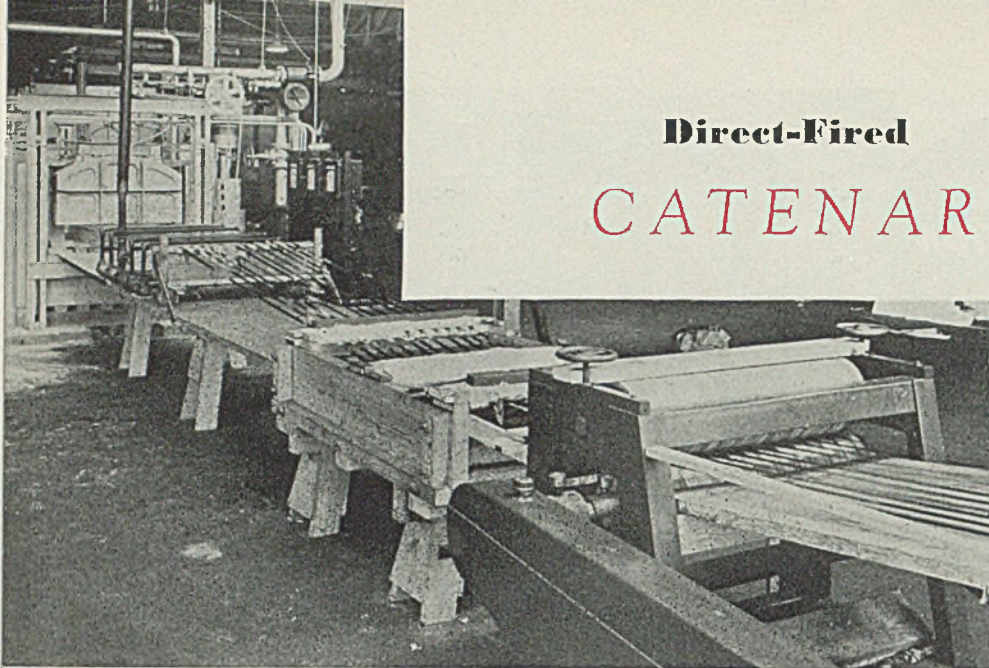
Discharge end of furnace. Stainless strip is drawn through pickling tank before coiling
